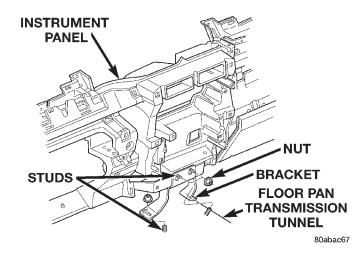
Instrument Panel Center Support Bracket Remove/Install
